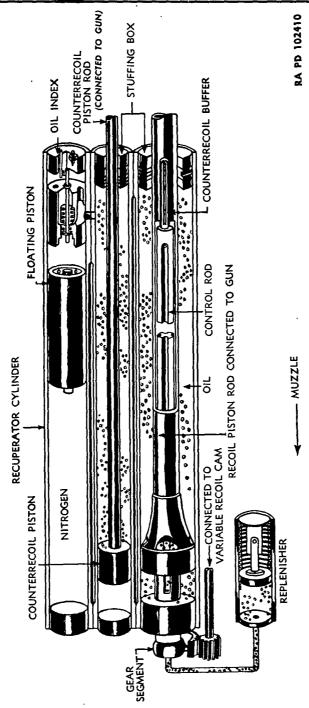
Variable Recoil Mechanism With Replenisher -- Schematic View
